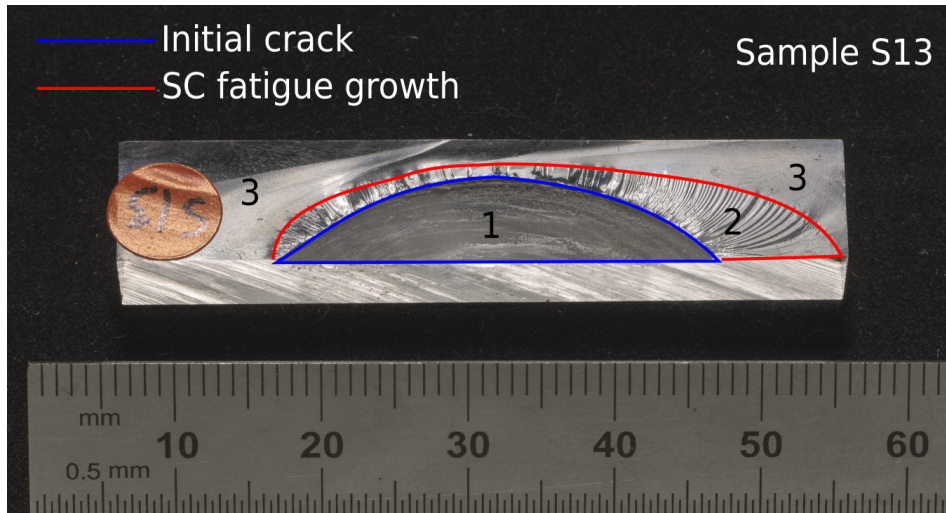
Test on Perspex plate - Fracture surface - Sample S13
